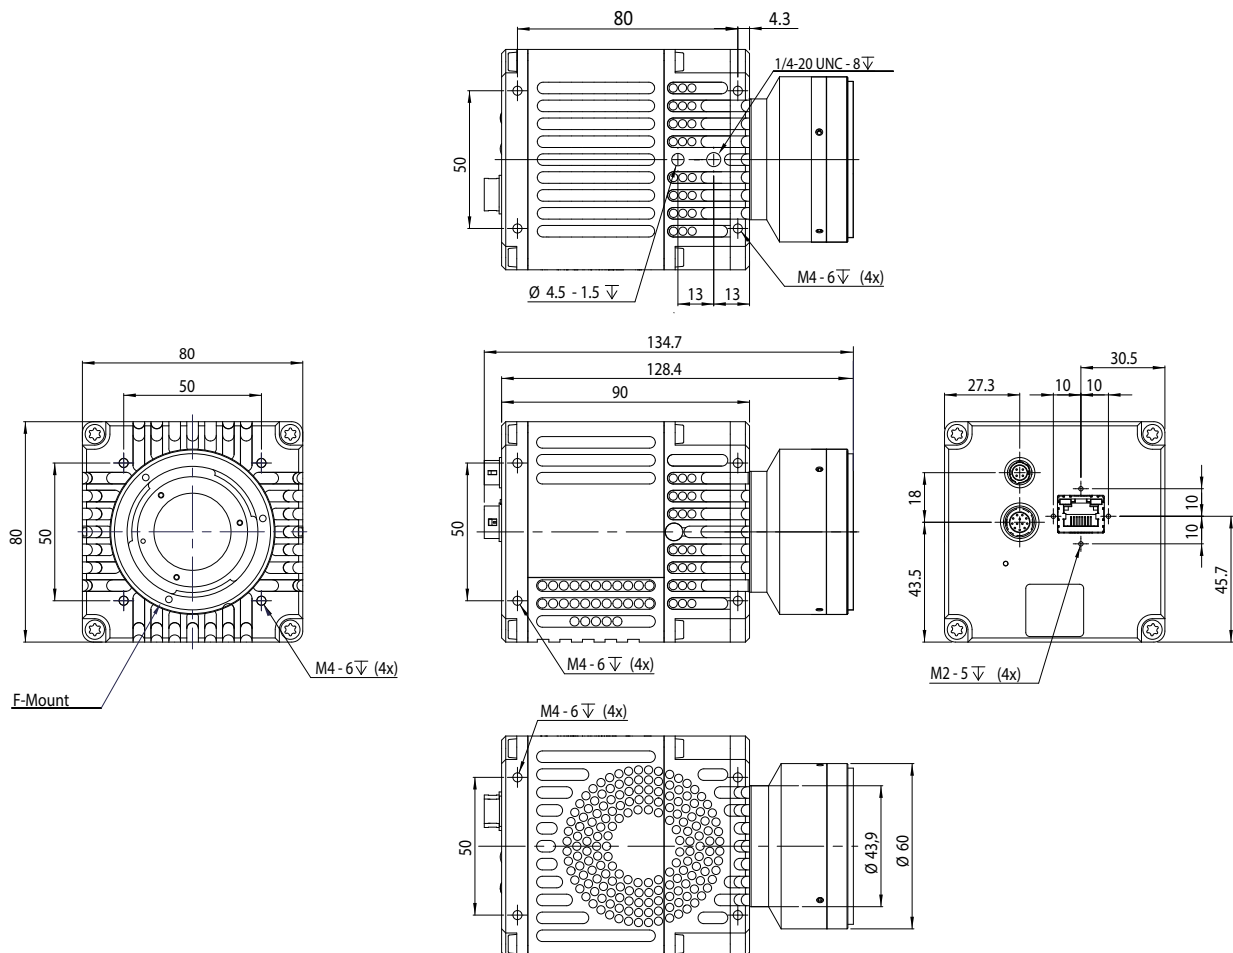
Goldeye G-008 SWIR Cool TEC1, -032 SWIR Cool TEC2 with F-Mount adapter
